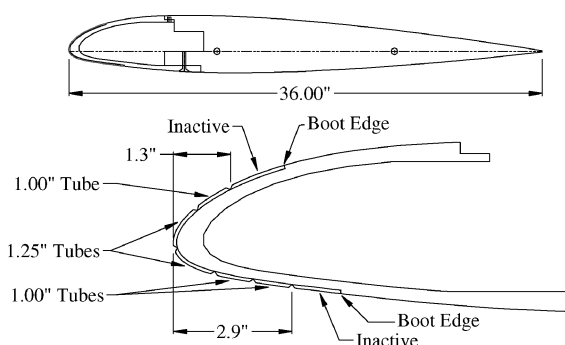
Cross-sectional schematic drawing of the NACA 23012 icing wind-tunnel model with removable leading edge and deicer.
